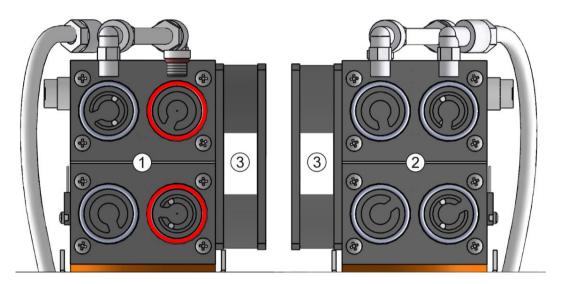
Valve arrangement: 1st stage (view from left), 2nd/3rd stage (view from right)
